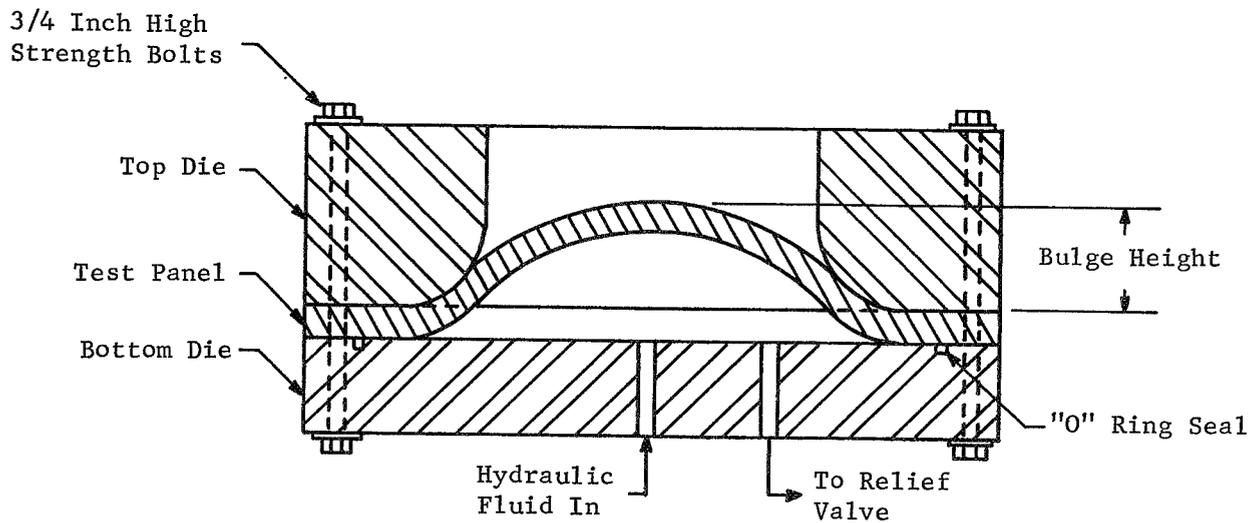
, Cross Section of The Hydraulic Bulge Test Fixture
